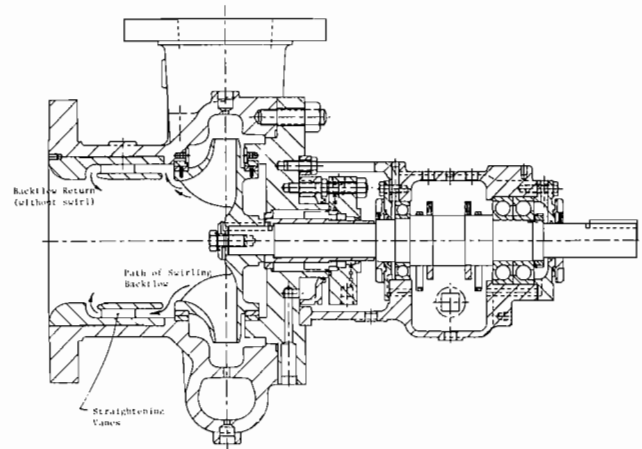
Sectional Drawing of 6 × 10 × 12 Test Pump Showing Backflow Recirculator Inserted into Suction Nozzle.
